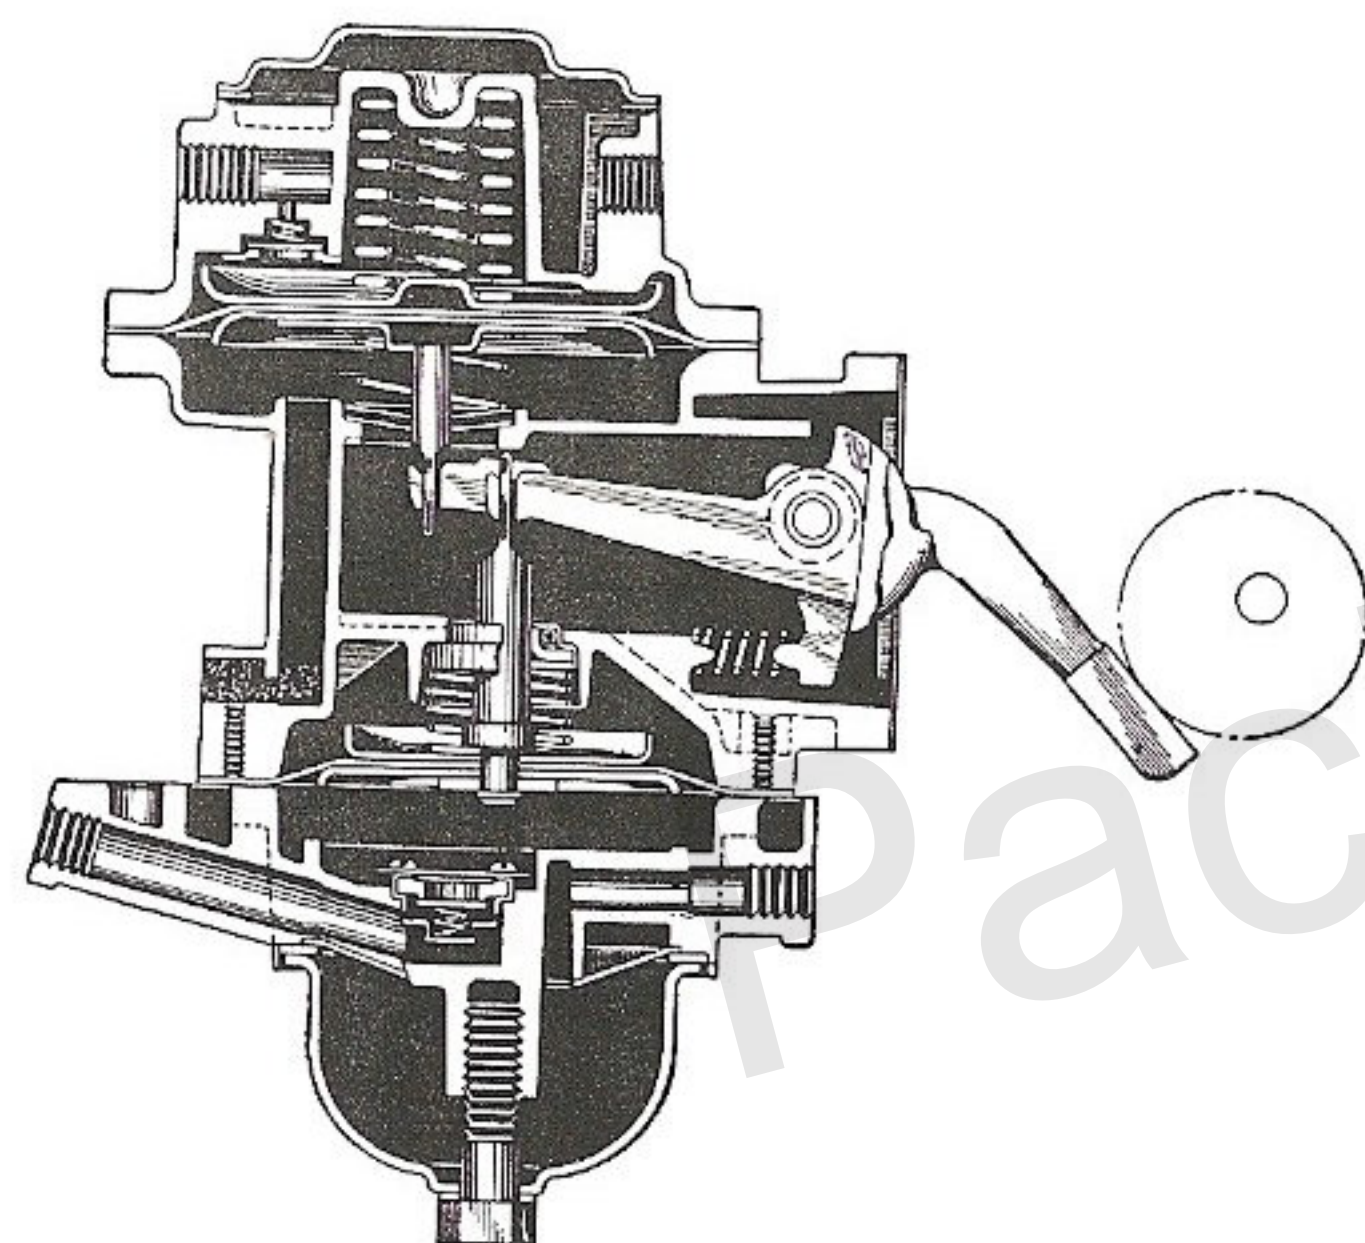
Fuel and Vacuum Pump Assembly. Note that Vacuum Unit is at Top
